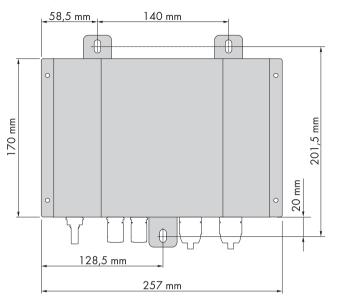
Dimensions of the SMA PV Offset Box and the drill holes for mounting
